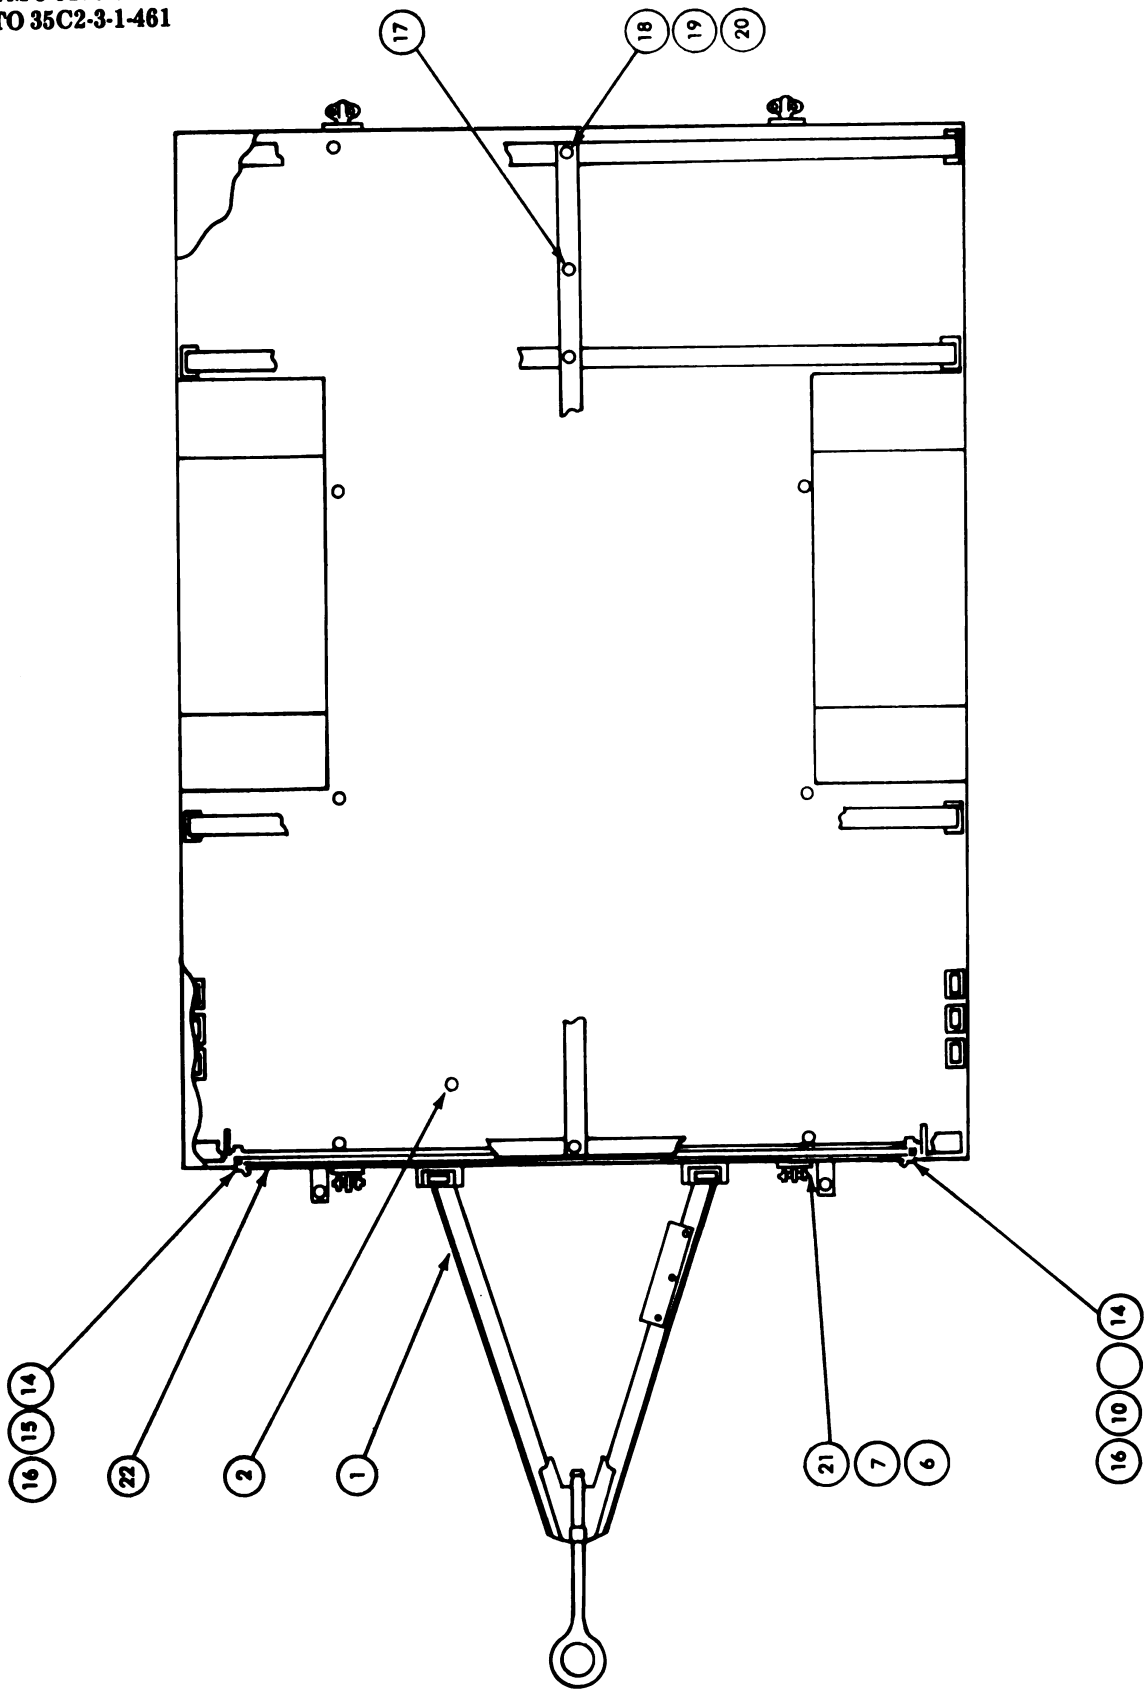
Trailer, Side, Top, and Rear Views (Sheet 1 of 3)
